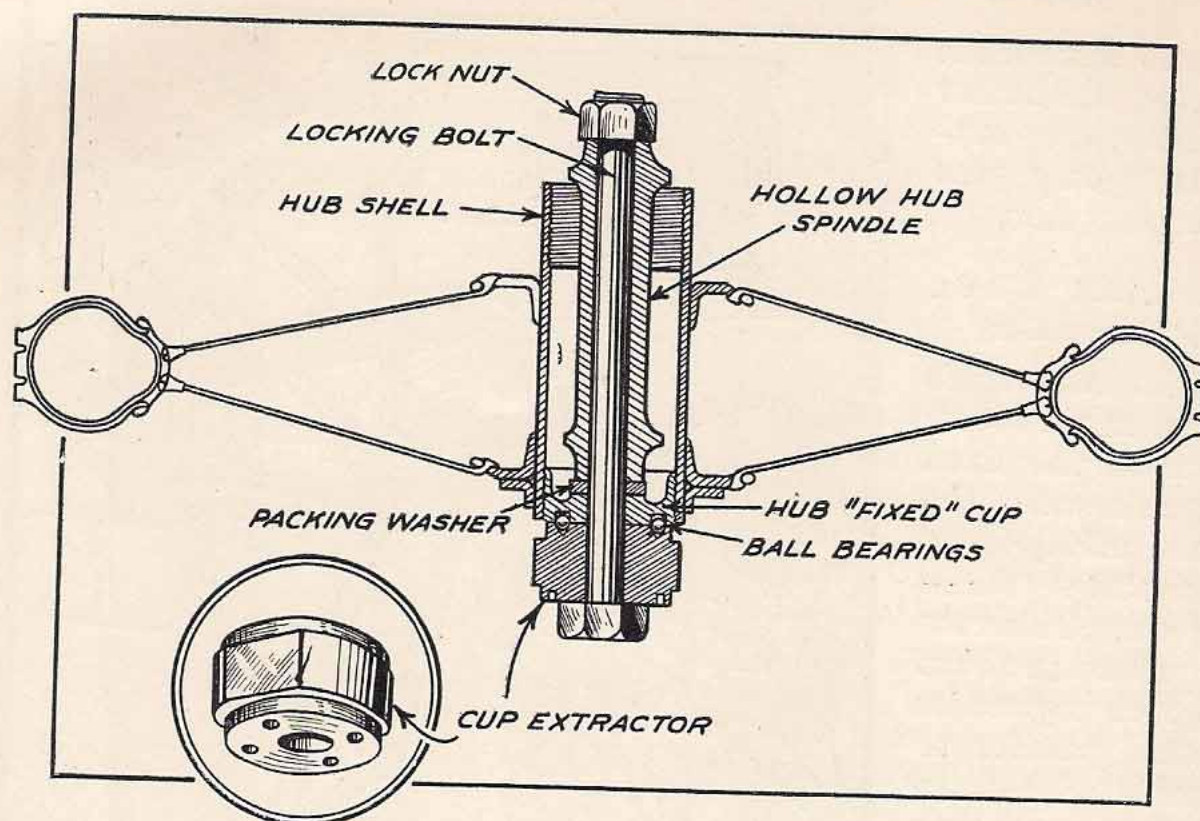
A TOOL FOR REMOVING HUB "FIXED" CUP.
